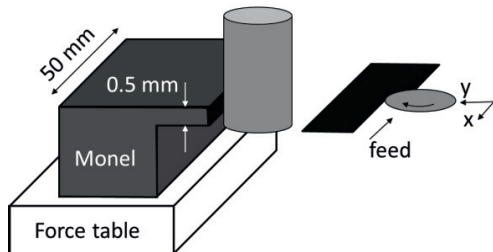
Schematic (not to scale) view of up milling set up, x,y the direction of forces on the tool.
